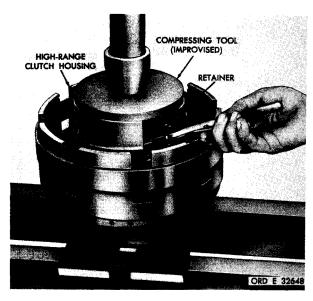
Removing (or installing) retaining ring that retains piston return spring retainer
